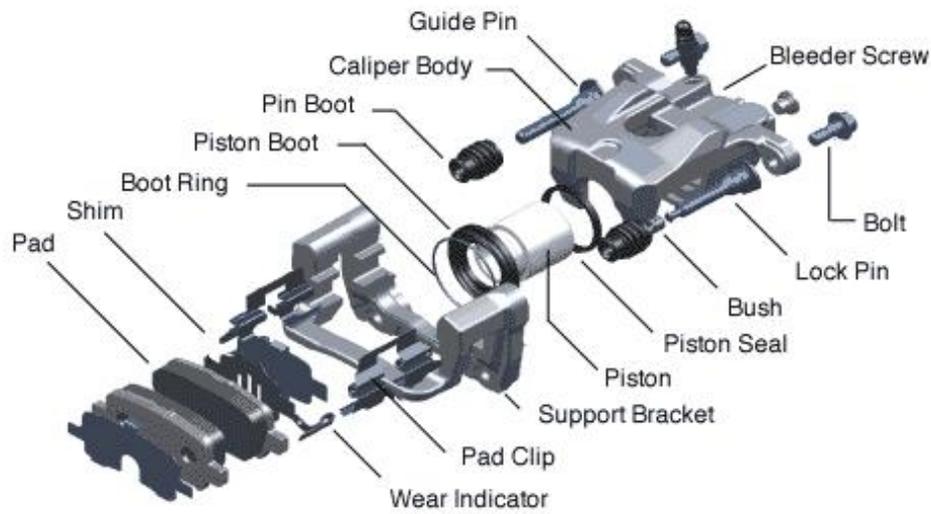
Front Caliper Assembly Component Diagram Example
